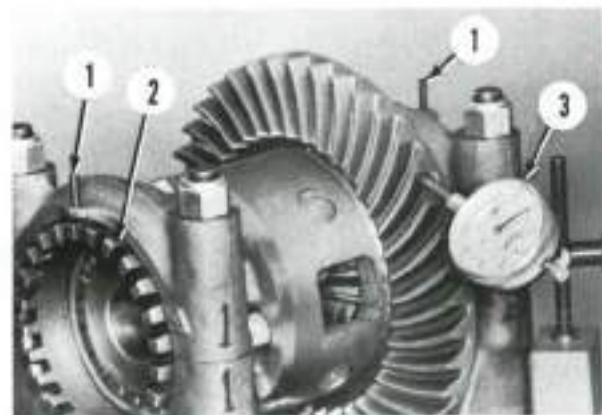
Dial indicator probe should be against outer tip of ring gear tooth when measuring backlash.
